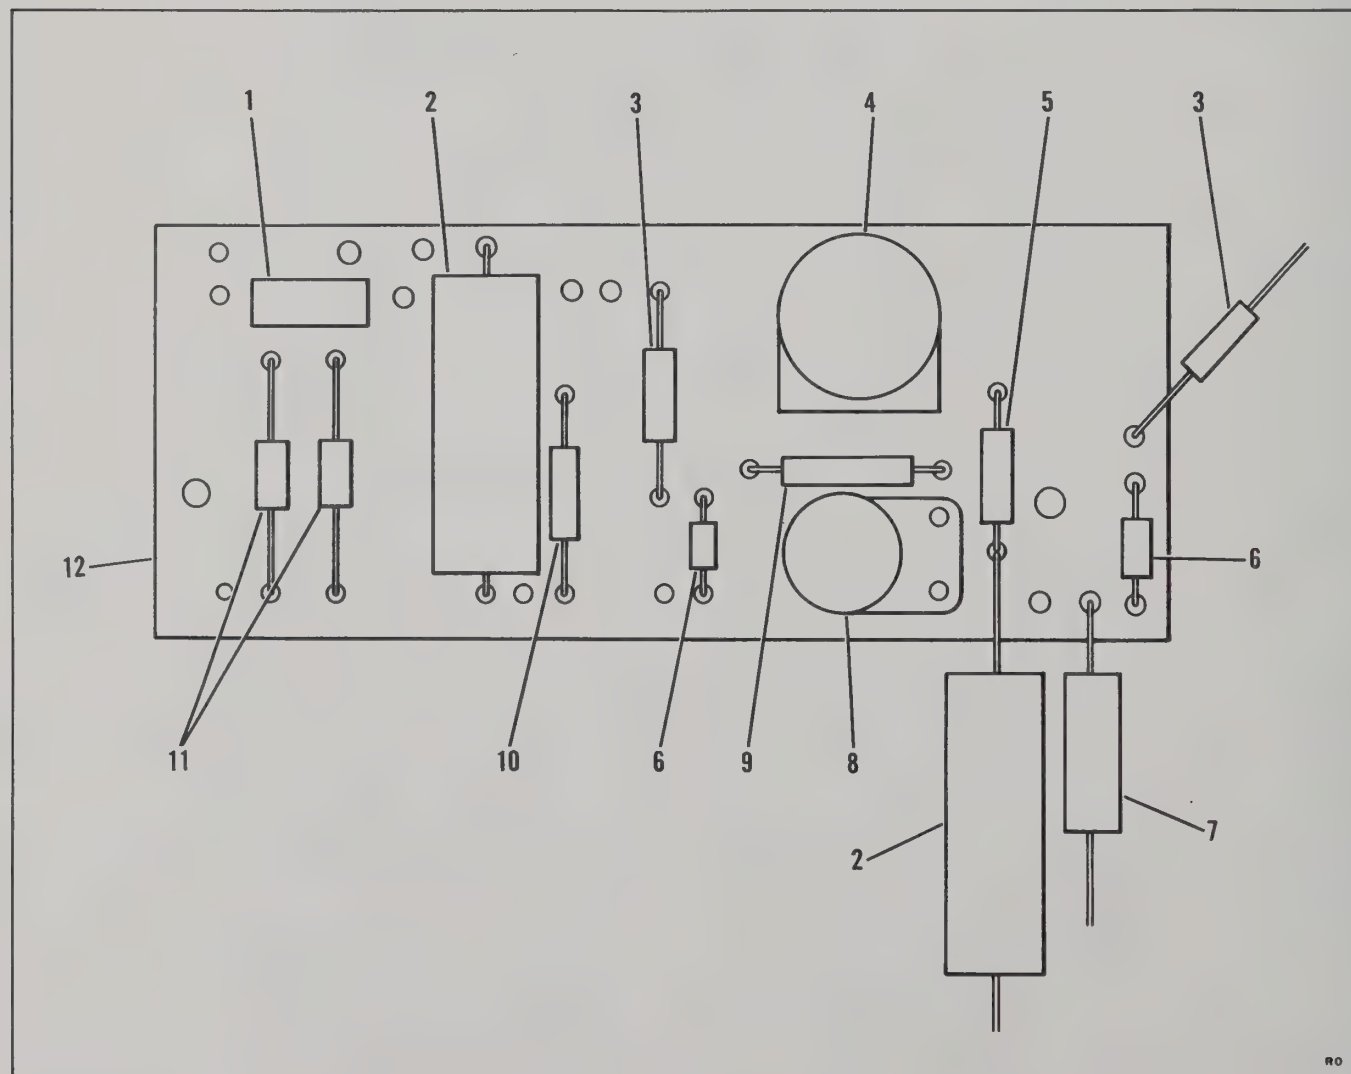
Printed Circuit Board Assembly, Part No. 400D-75F
